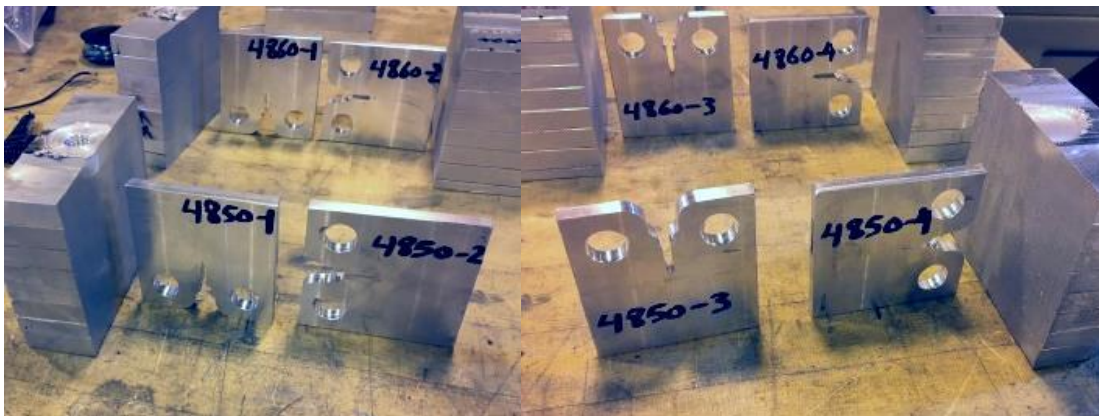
Machined C-T specimens with notch orientations for crack growth
